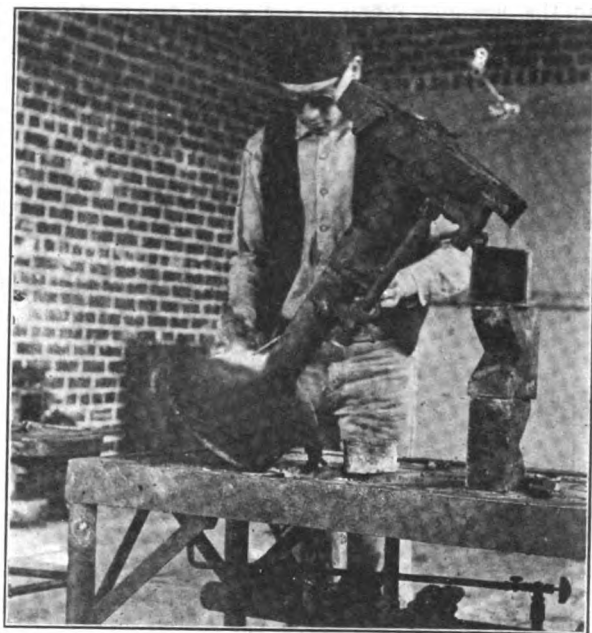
Tilt the Casting Enough To Bring the Grooved Crack Uppermost.
